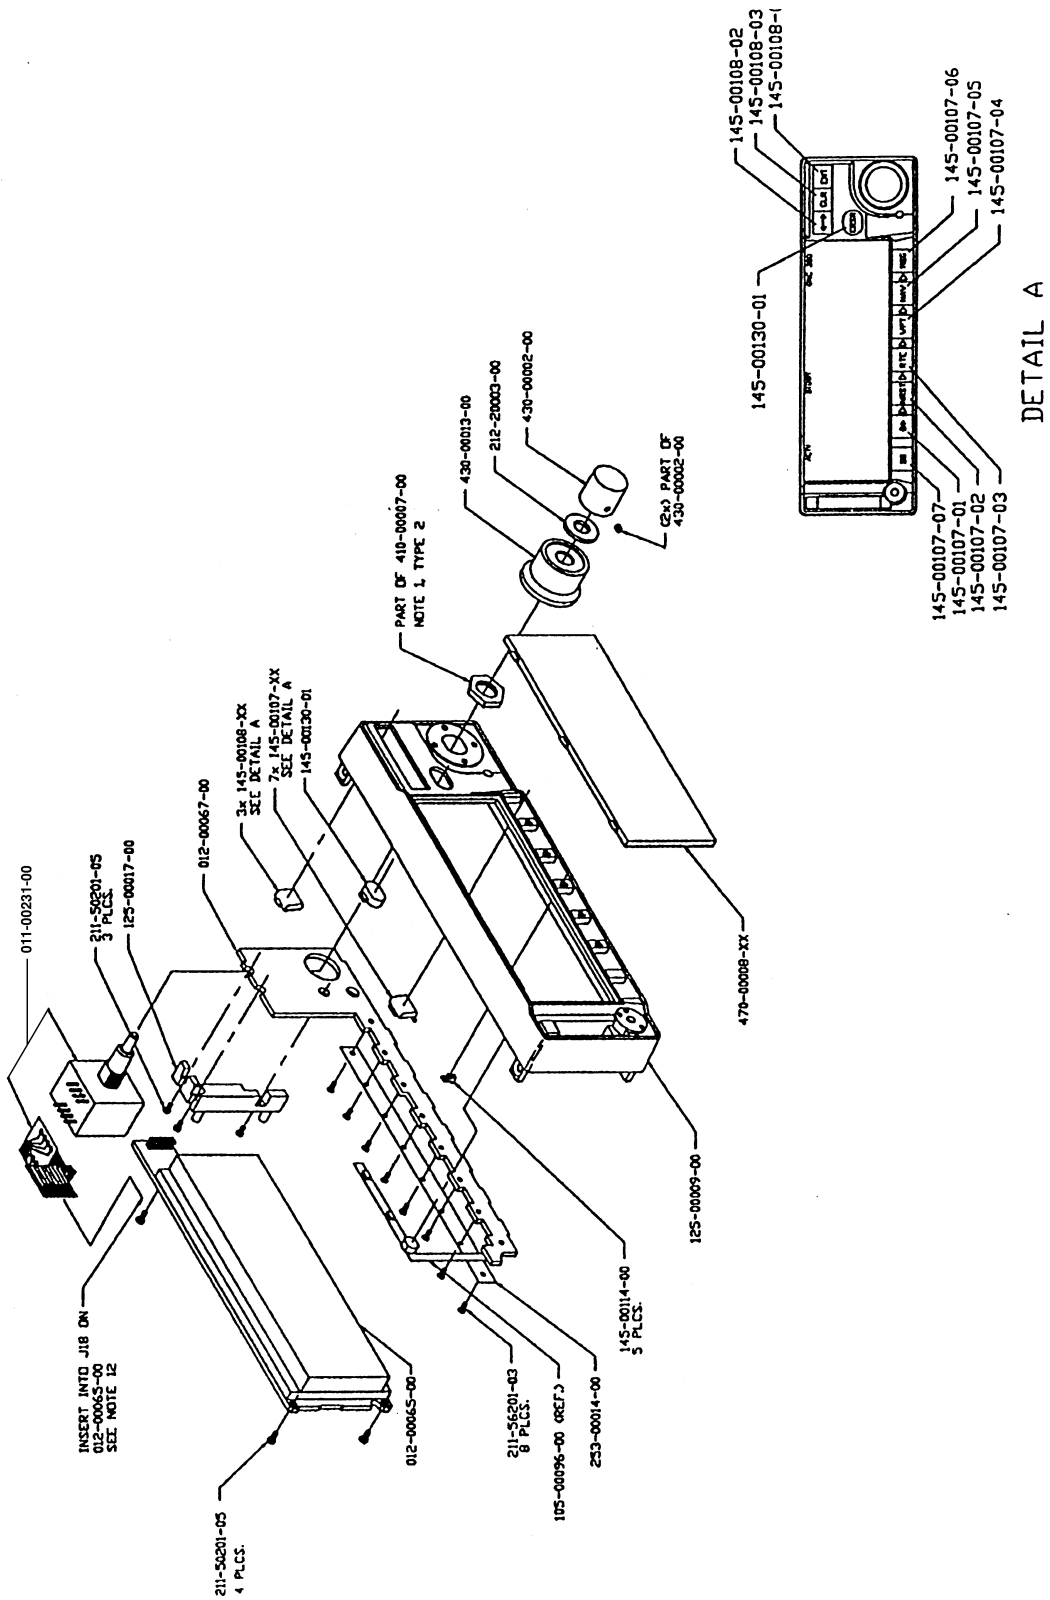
GNC 250/300 Assembly Drawing (View 1)
